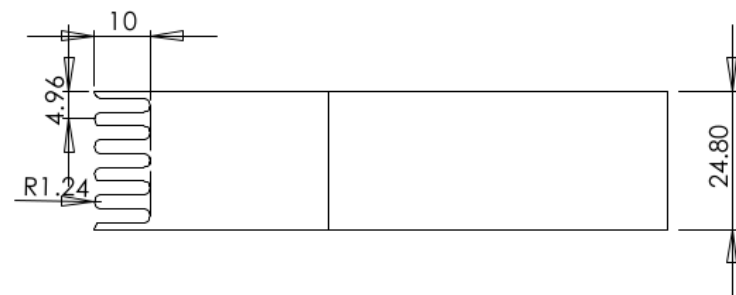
Cut out section from existing pipework (all dimensions in (mm))
